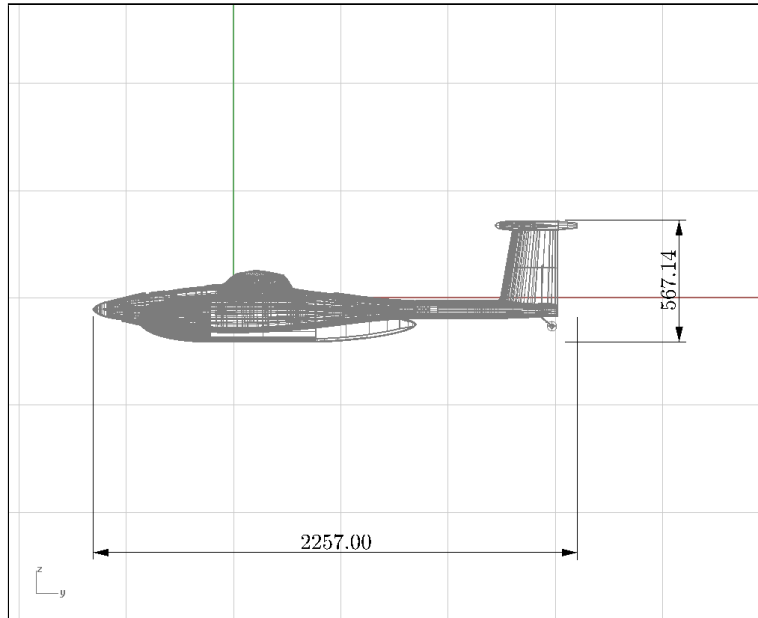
Side view of the CSIR's Modular UAS (dimensions in millimeters).
